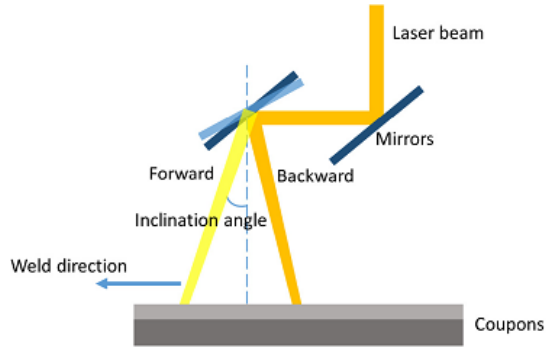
Schematic of remote laser lap welding process on AA5182 1 mm + 2 mm plates
